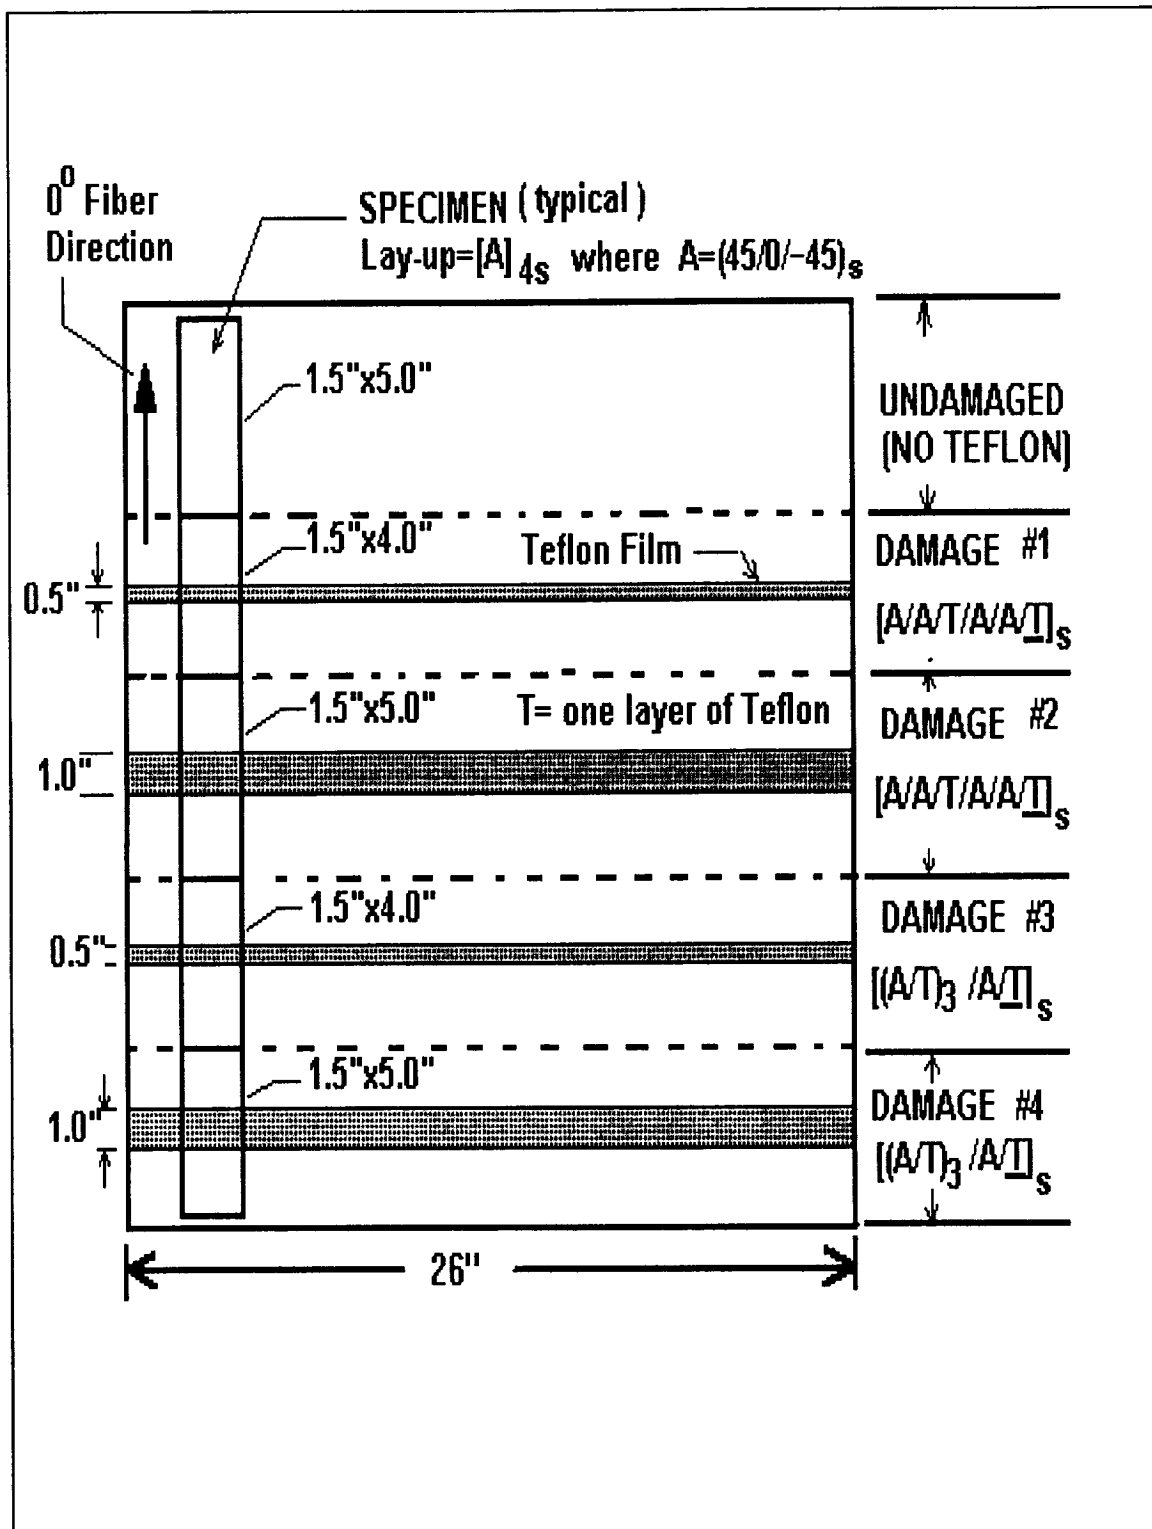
Details of a typical RTMed plate for Sublaminar Buckling Test specimens
